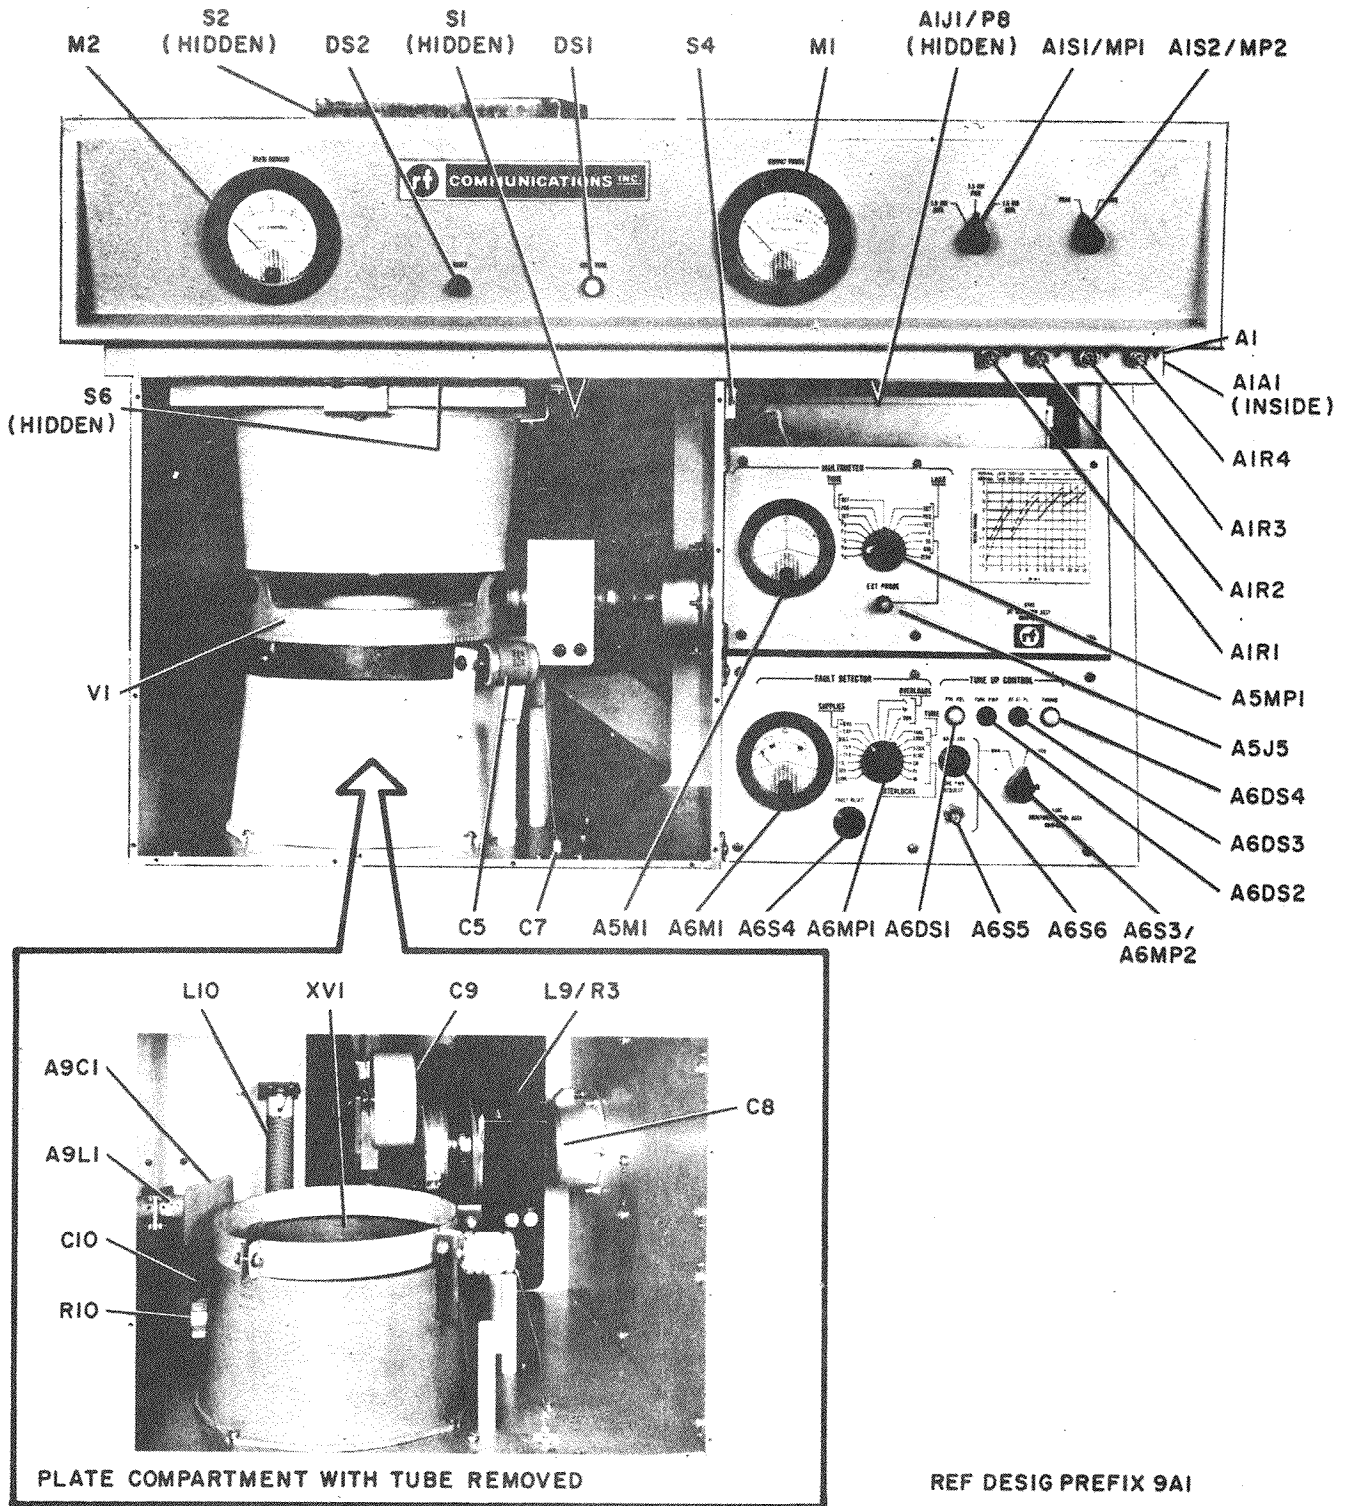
10 KW PA, Chassis Assembly 9A1, Front Top View, Component Locations
